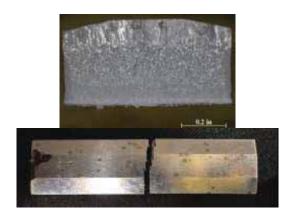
Tungsten Carbide and Mild Steel. The upper photo shows the cross-section of the fractured surface. Note WC particles as the source of the fatigue failure. The lower photo shows numerous WC particles with act as nucleation sites for fatigue failure.
